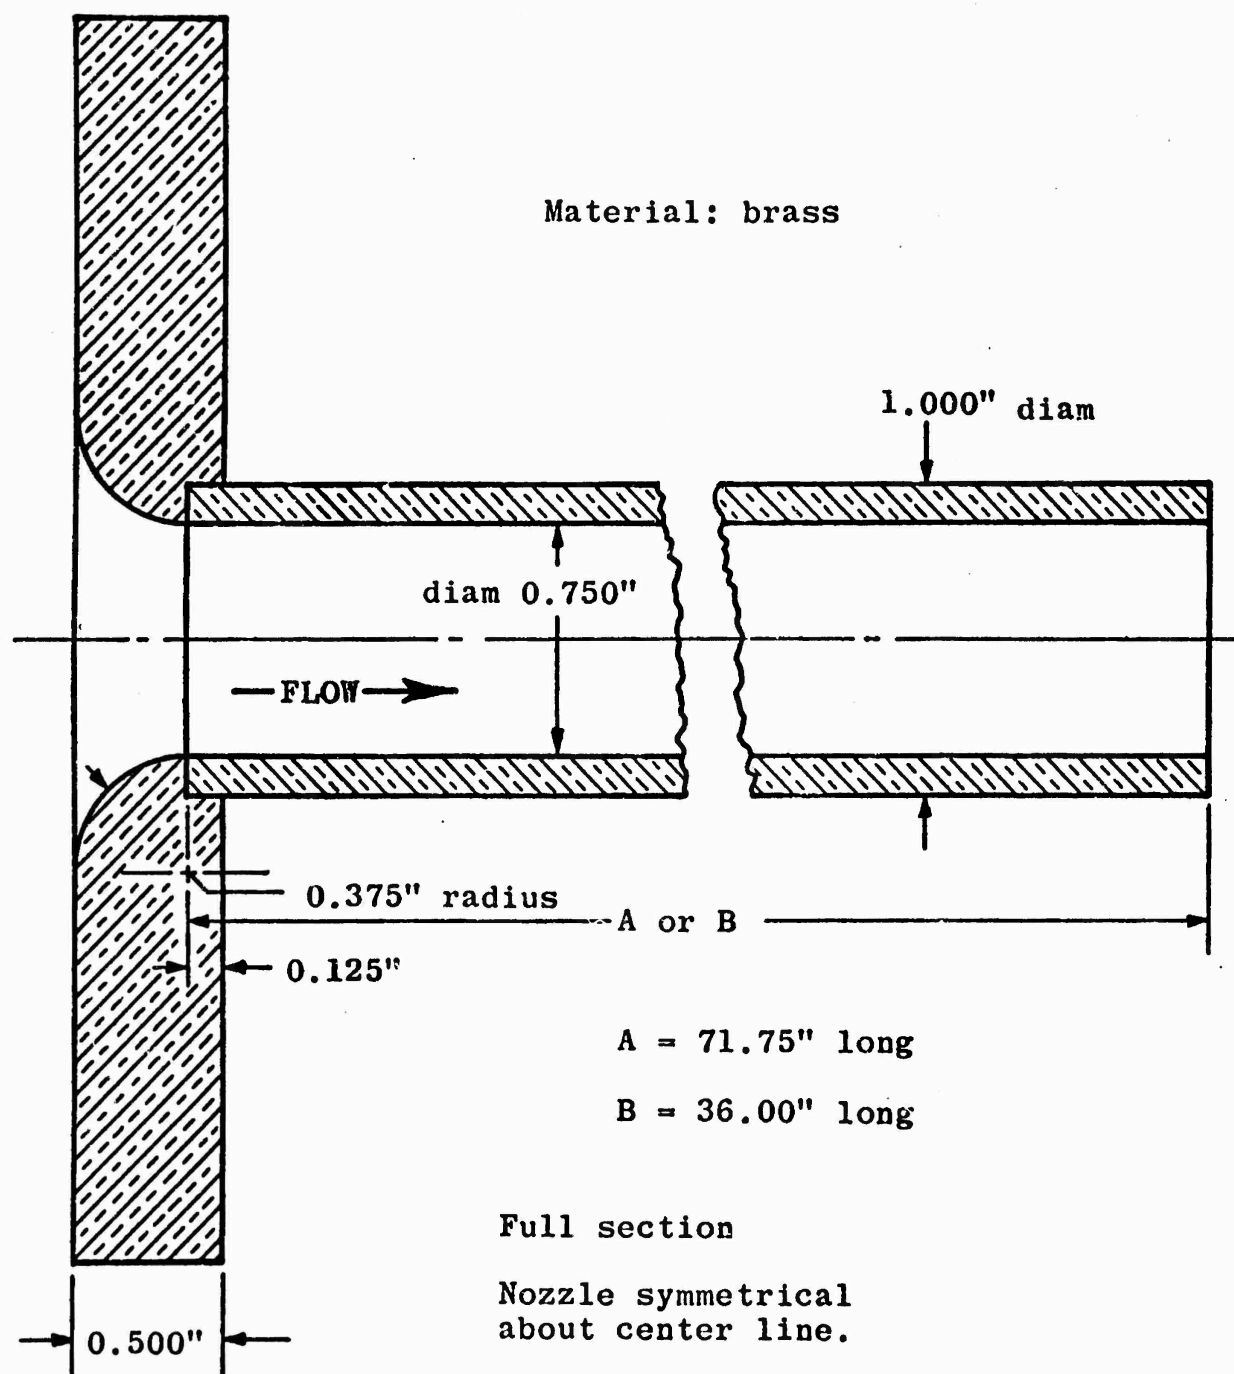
NOZZLE WITH LONG EXTENSION TUBE.
